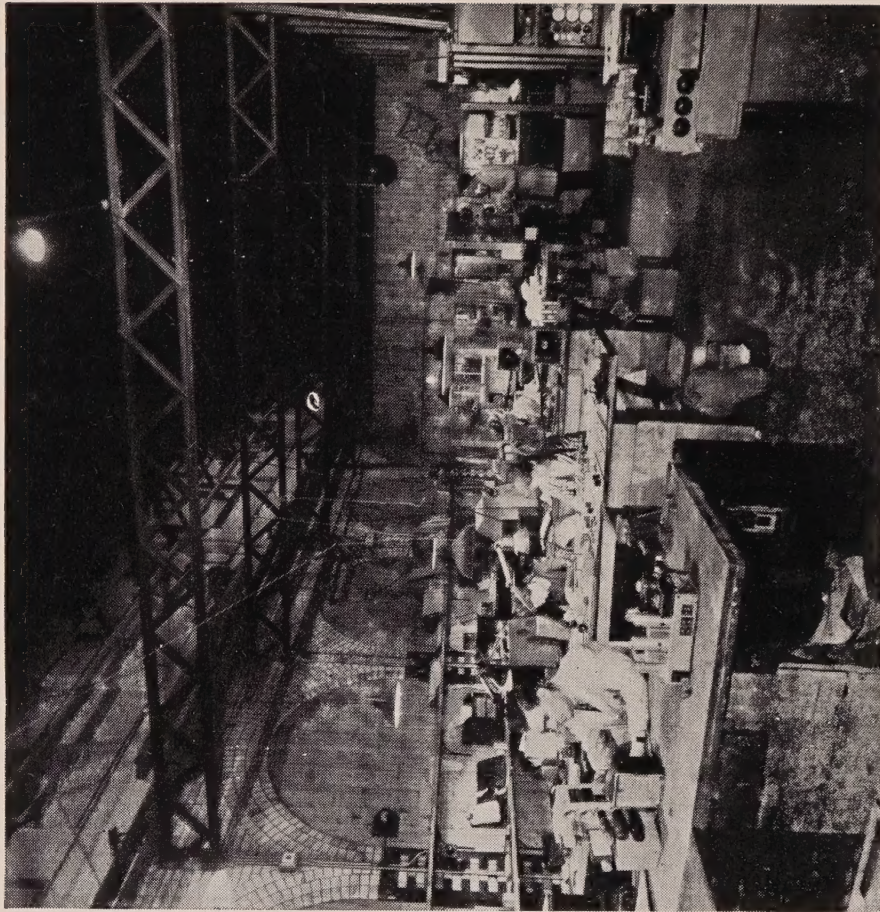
SOME LIGHTING DEFECTS REMOVED
